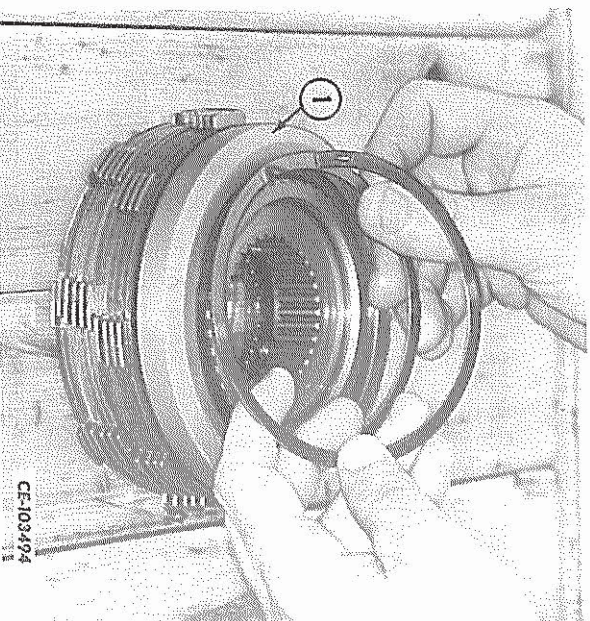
Removing the Clutch Hub Spiral Snap Ring
